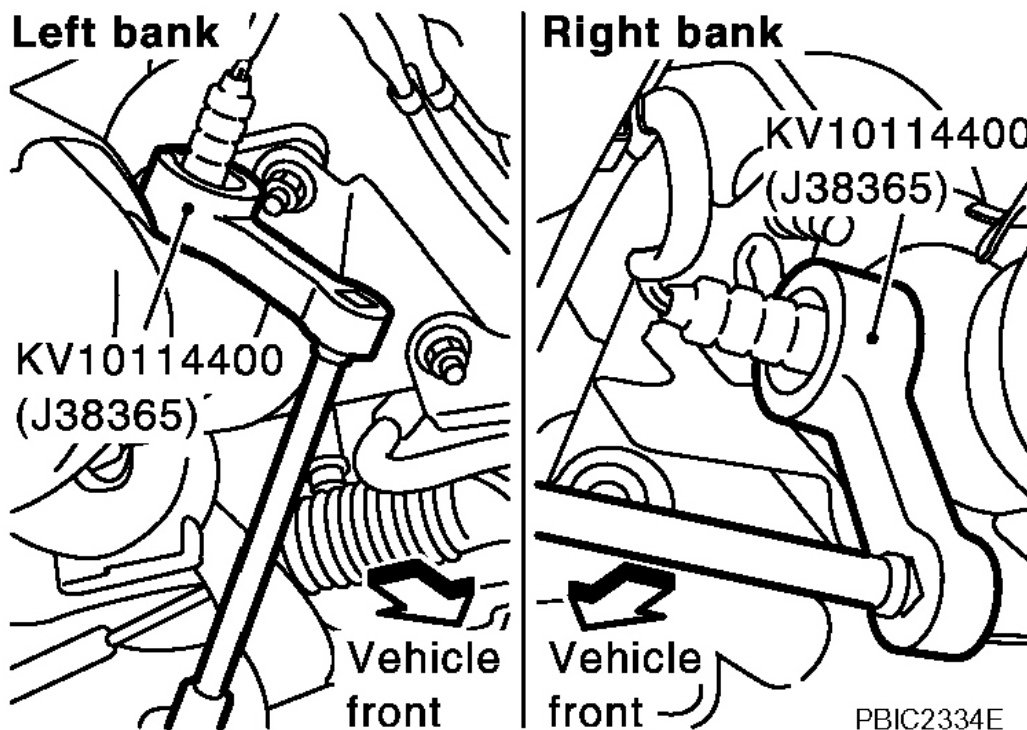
Identifying Air Fuel Ratio Sensor 1 And Heated Oxygen Sensor 2 On Both Bank (Side View)
